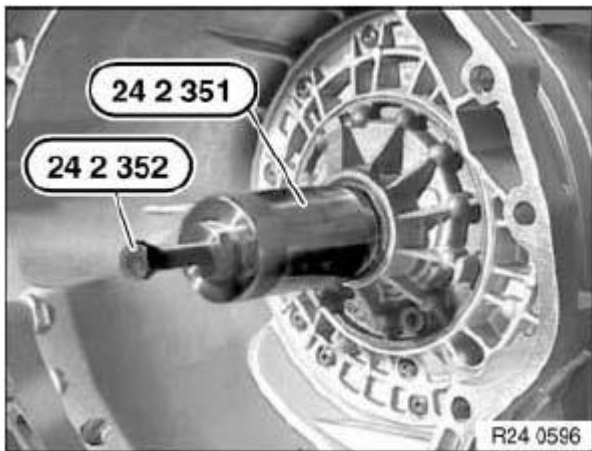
Identifying Special Tools (24 2 351 And 24 2 352)
